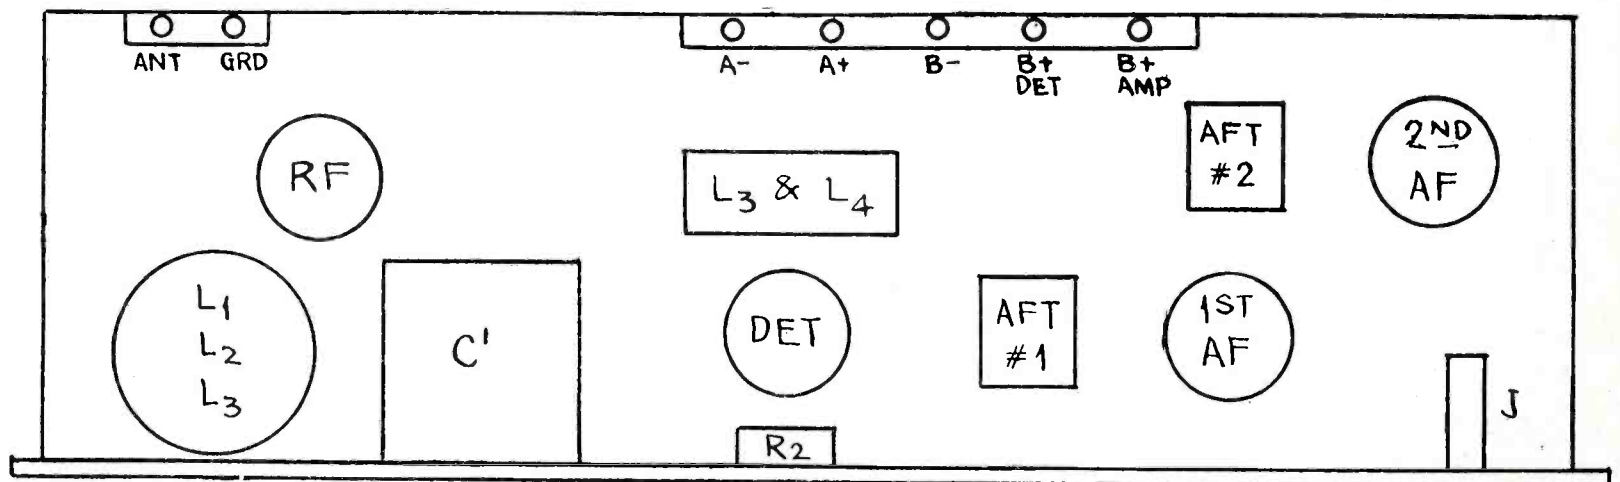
Arrangement of parts on baseboard and relative location of parts mounted on panel.
